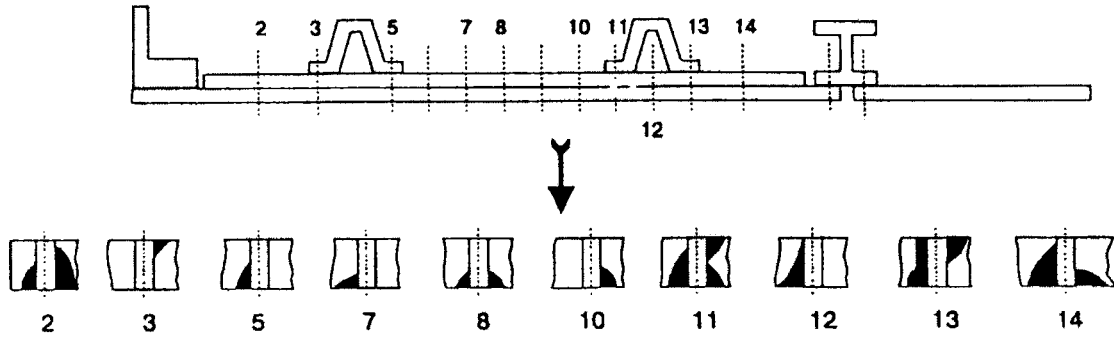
Damage in Strip Coupling the Skin Sheets on Wing Lower Surface:
